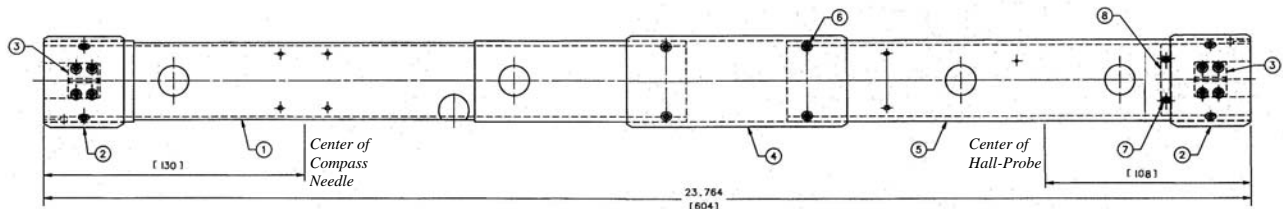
Cart Drawing: 1 – front aluminum body where flex circuit winding (compensation coils) is wound (compass mounted within this body); 2- front and rear Teflon covers; 3 – guiding wire attachment; 4 – Teflon attachment; 5 – rear aluminum body with Hall-probe; 6 – attachment's screw holes; 7 – signal connector mounting holes; 8 - signal connector mount;
